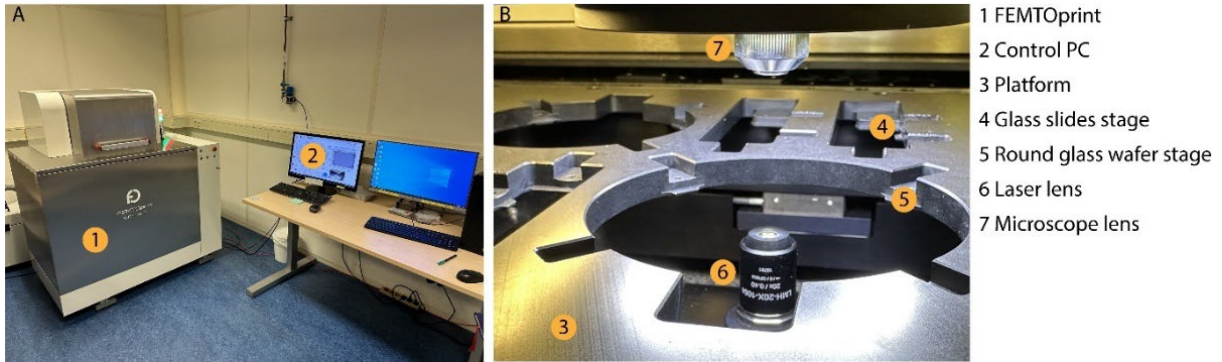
FEMTOprint f200 aHead machine. (A) The machine and its control PC. (B) The workpiece holder platform. Glass slides and wafers can be mounted on the platform. The laser lens focus a beam of laser upwards. A microscope placed above the workpiece can be used to monitor the laser machining process.
